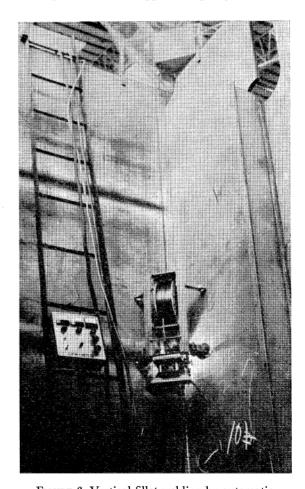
Vertical fillet welding by automatic oscillation without shielding gas.
